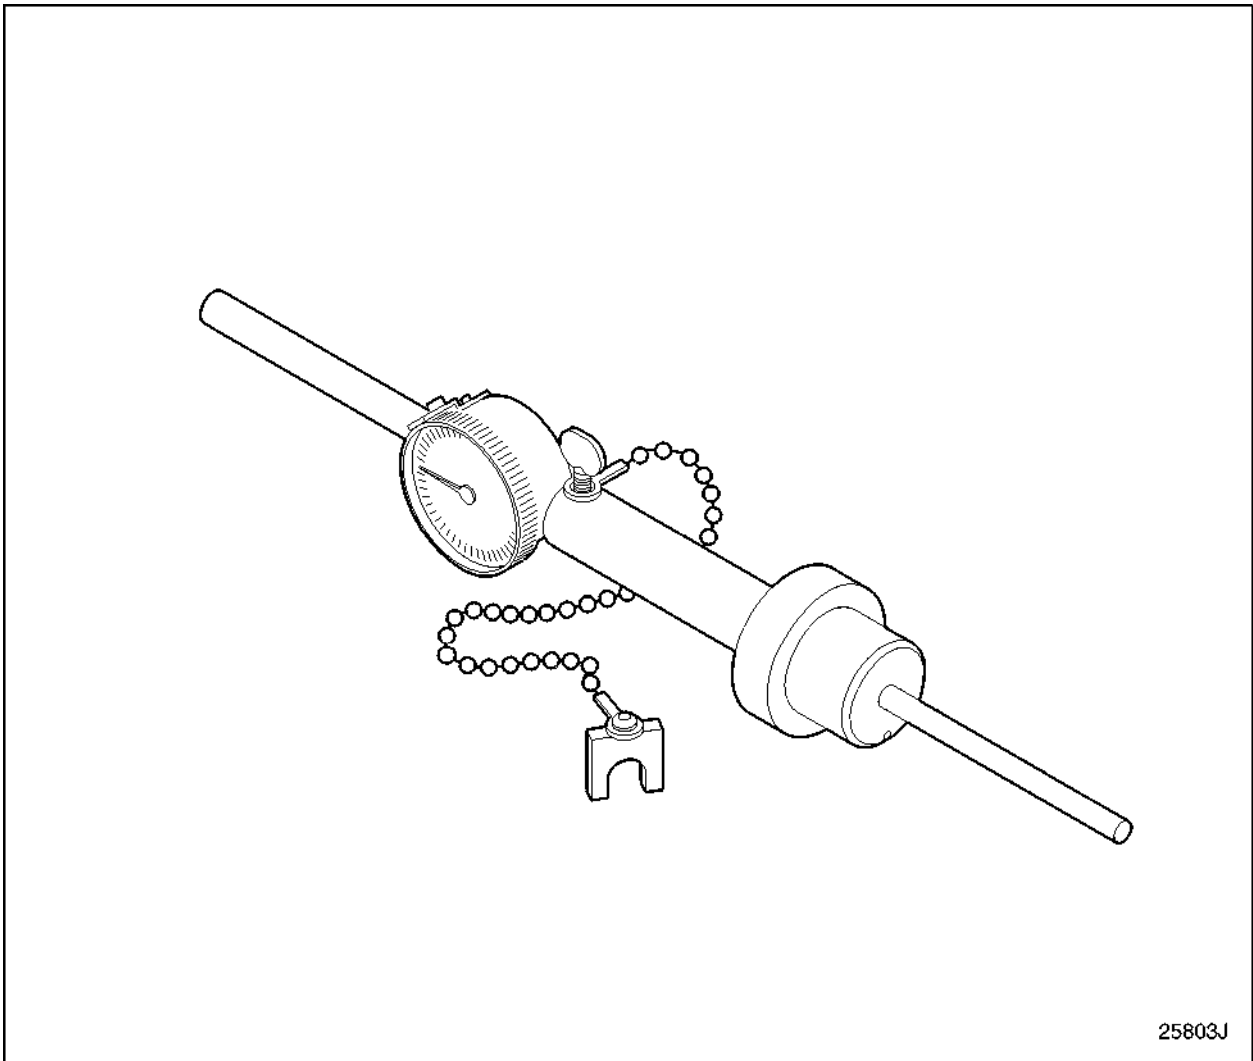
Crankshaft Position Timing Tool J 34930-A
